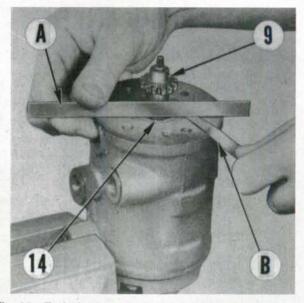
End of valve spool must be flush to no more than 0.0025 inch (0.064 mm) above face of valve body. Refer to text for shimming procedure.
